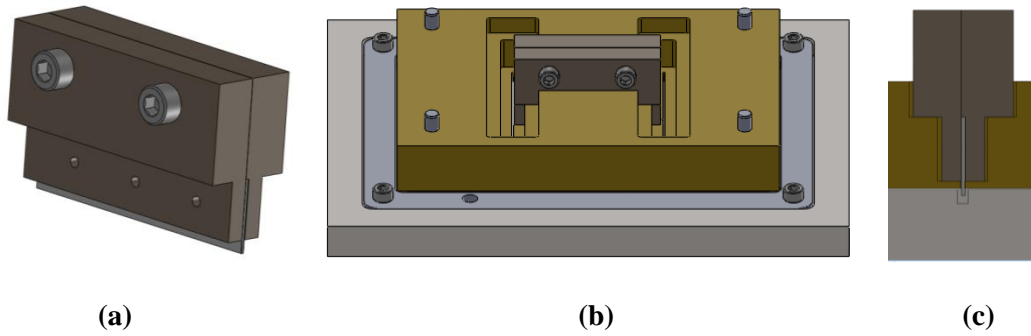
(a)The punch. It consists of three parts, a stainless steel blade of width 500 μm held between two aluminium pieces. The aluminium pieces keep the blade vertical and provides a punch-stop while bending the plate as shown in (b) and (c).
